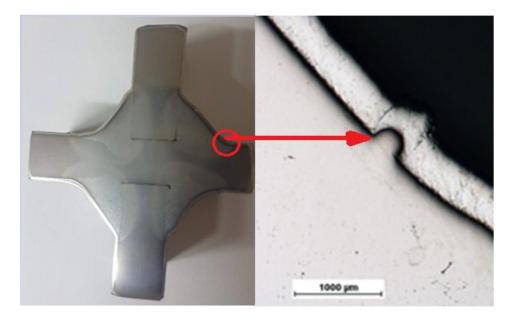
Specimen No. 10, with notch close to weld toe.
